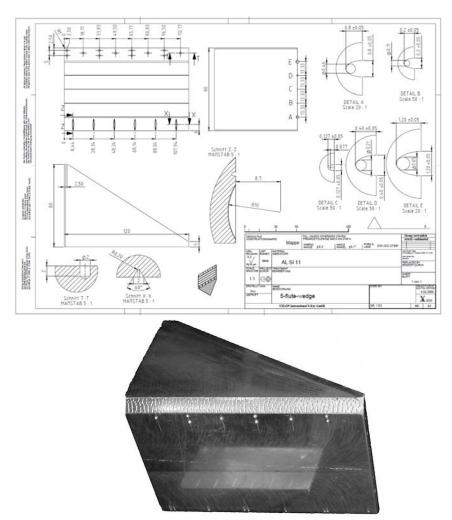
five groove wedge - CAD drawing and photo (with inner longitudinal holes instead of grooves)
